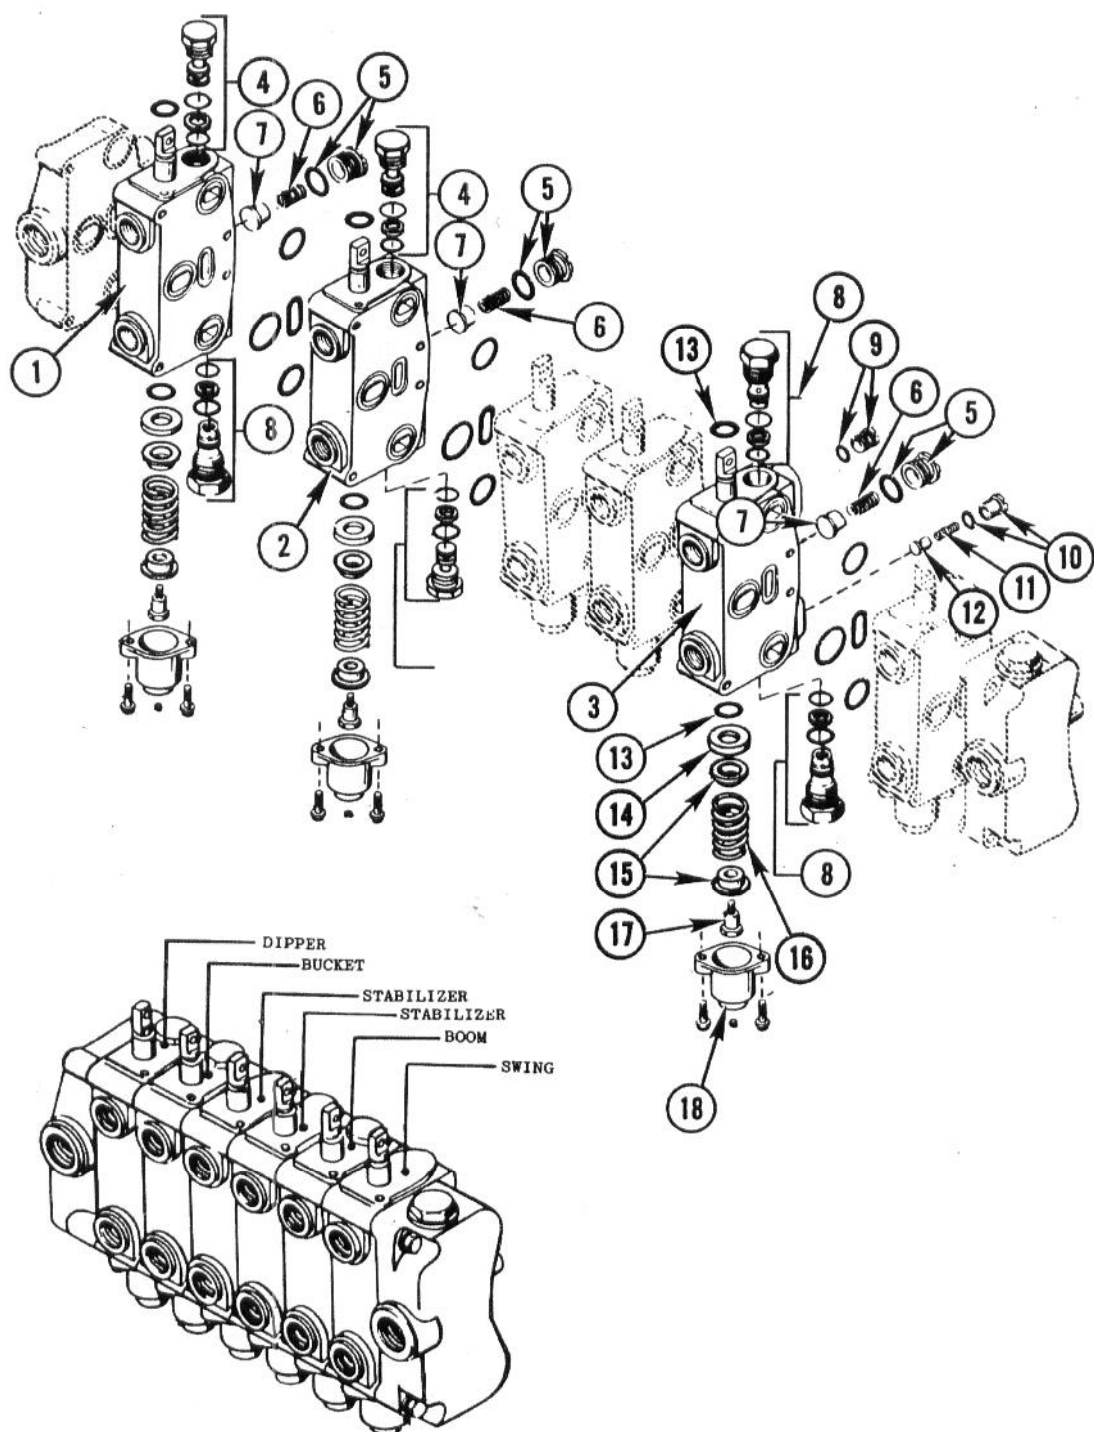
Dipperstick, Bucket and Boom Sections of Control Valve
